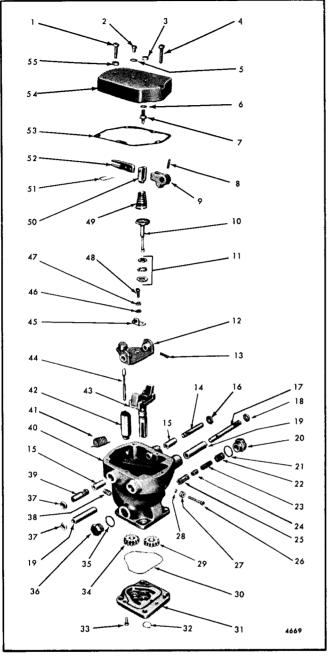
Hydraulic Governor Details and Relative Location of Parts (Current)
